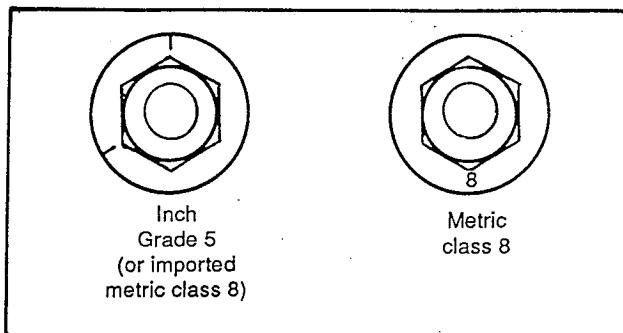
Flange Nuts Can Be Marked On Top Of The Flange Instead Of On Top Of The Nut.
